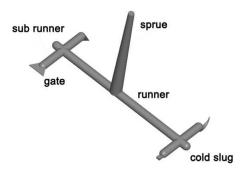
Gate, runner and sprue after removal from an injected molded part [30]
